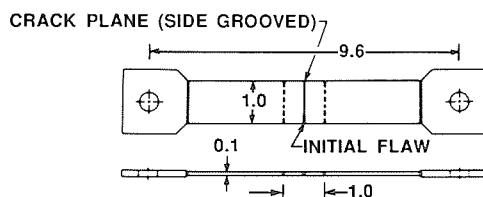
Schematic of HSST wide-plate crack-arrest specimen.
